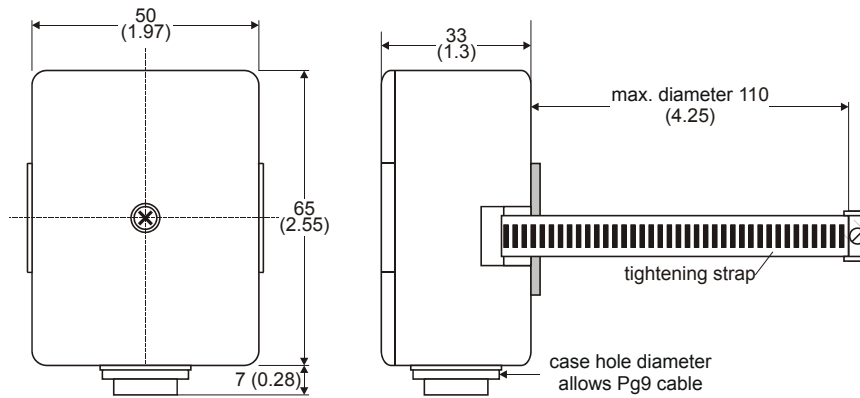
Dimensions of T7414A / VF20A / WPF20A in mm (inches)
